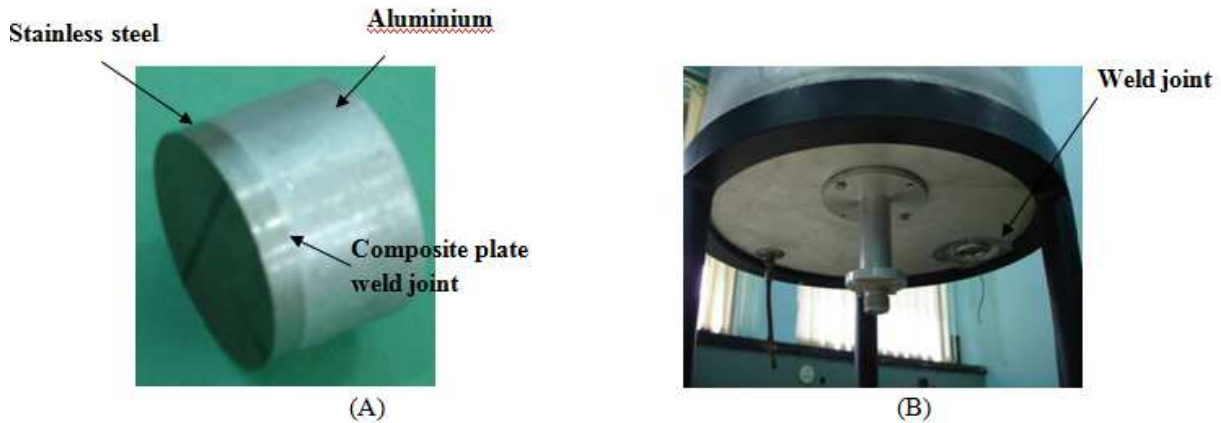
Picture of SS-Al clad plate (A) and weld joint (B)
